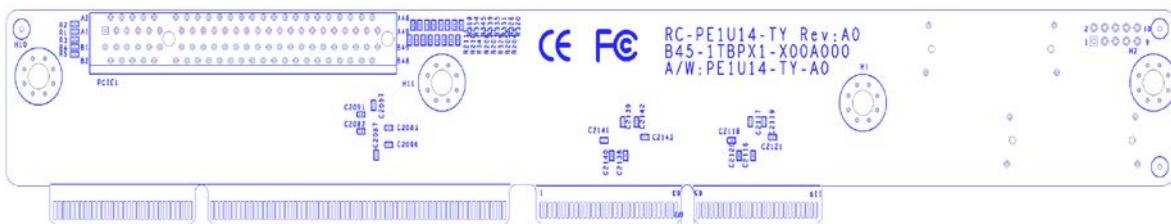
Top Side PCBA Placement of RC-PE1U14-TY
